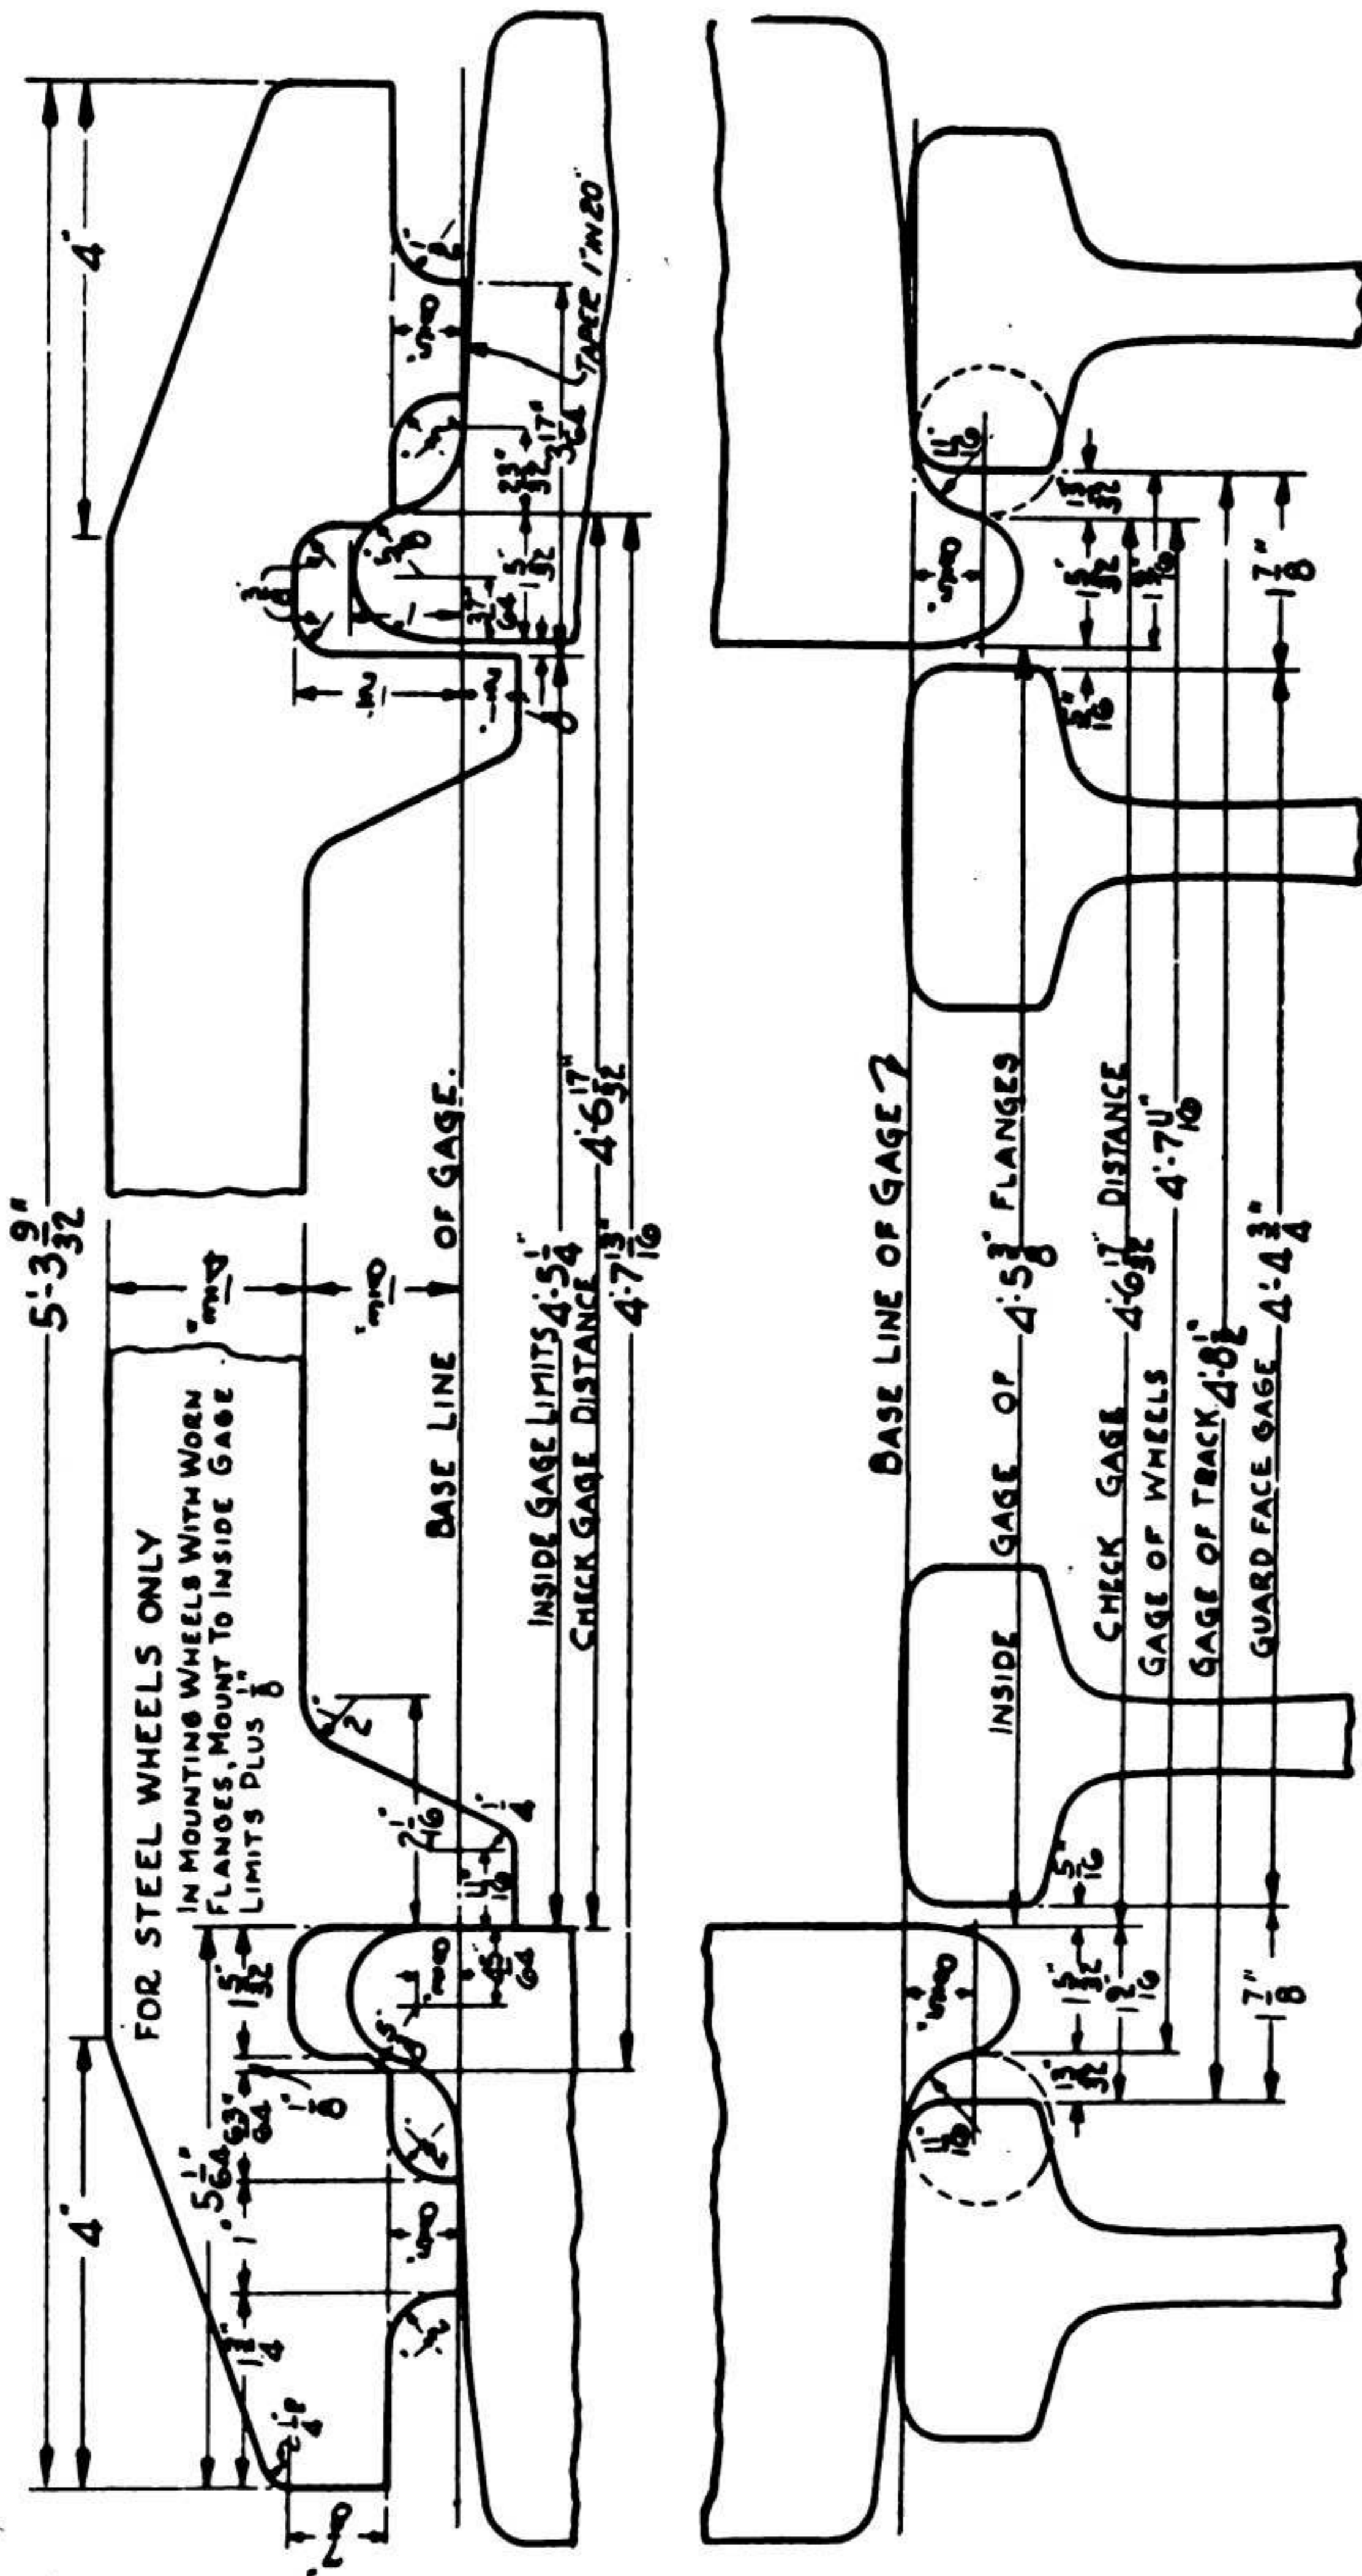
Mounting gauge for multiple and two-wear wrought steel wheels and multiple wear cast steel wheels. (T.C. Stock No. 41-4012-16-022.)
